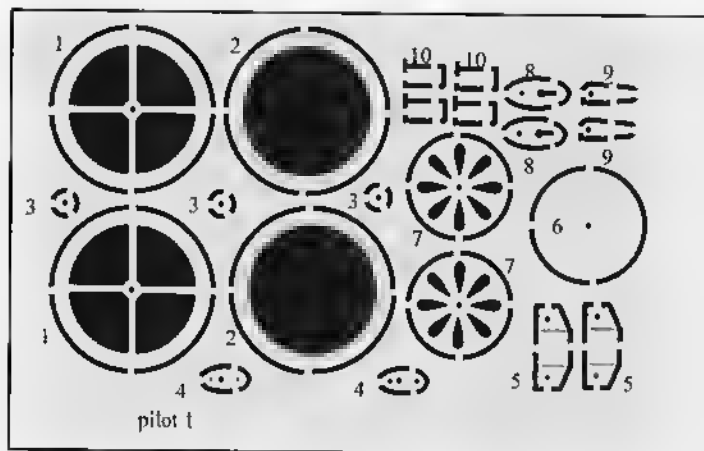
A CAD drawing showing the part numbers on the printed sheet to be kept for future reference. See parts list in the text.
